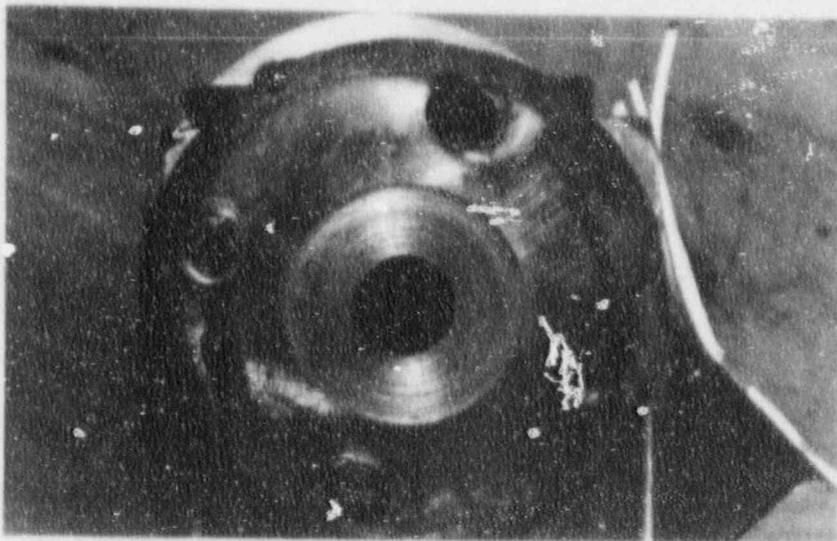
View of the left rear stubshaft flange. Note, the elongation of the dowel bolt holes due to torsional loading of the flange as the camshaft was seizing, and rubbing against the crank bolt.
